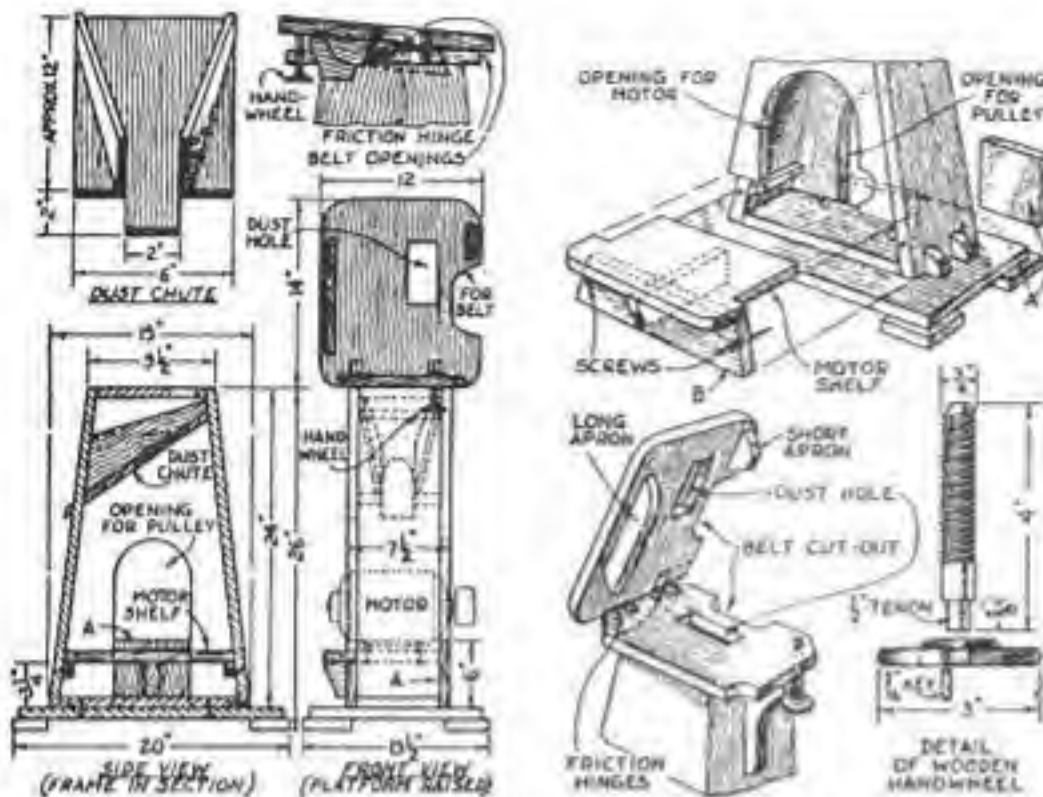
Detailed drawings of the bench saw table; how the motor support or shelf is built as a removable unit; and the belt-tightening device.
